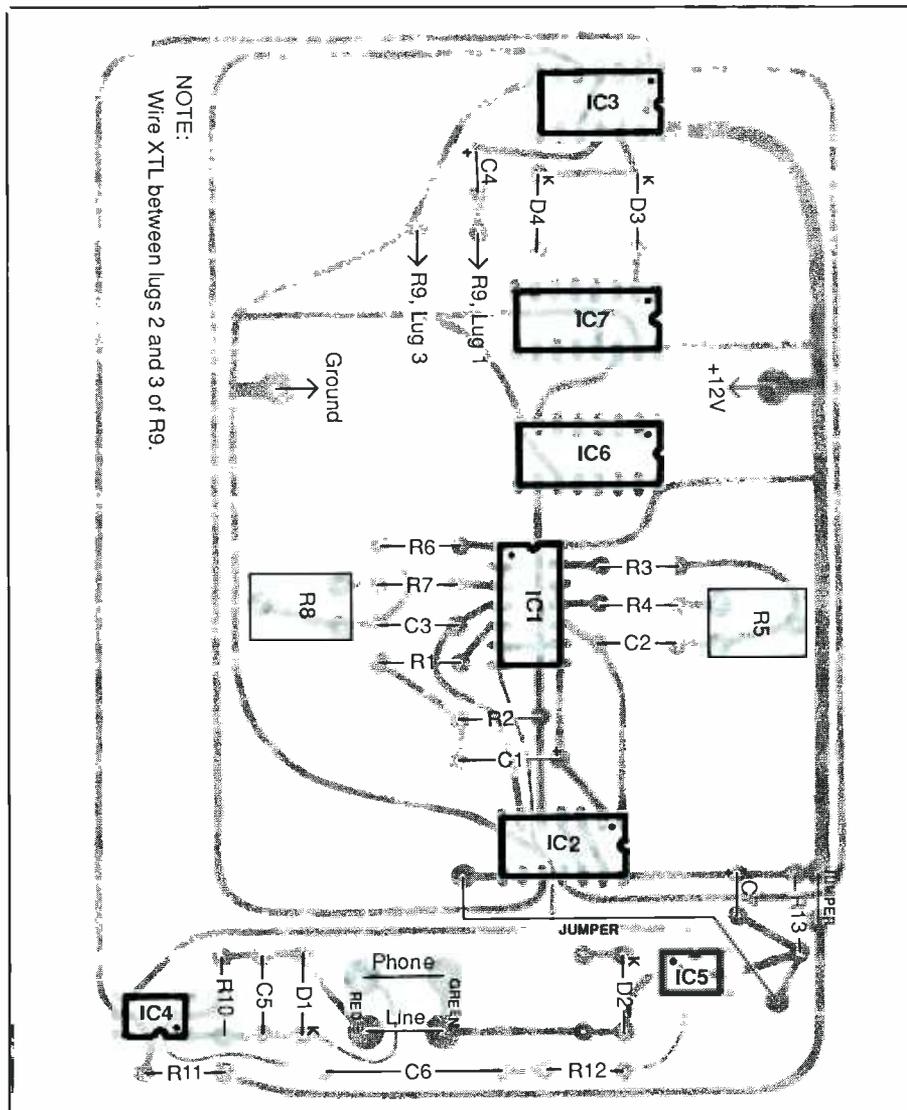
Wiring guide for pc board. Use this as rough guide for positioning components when wiring on perforated board.
